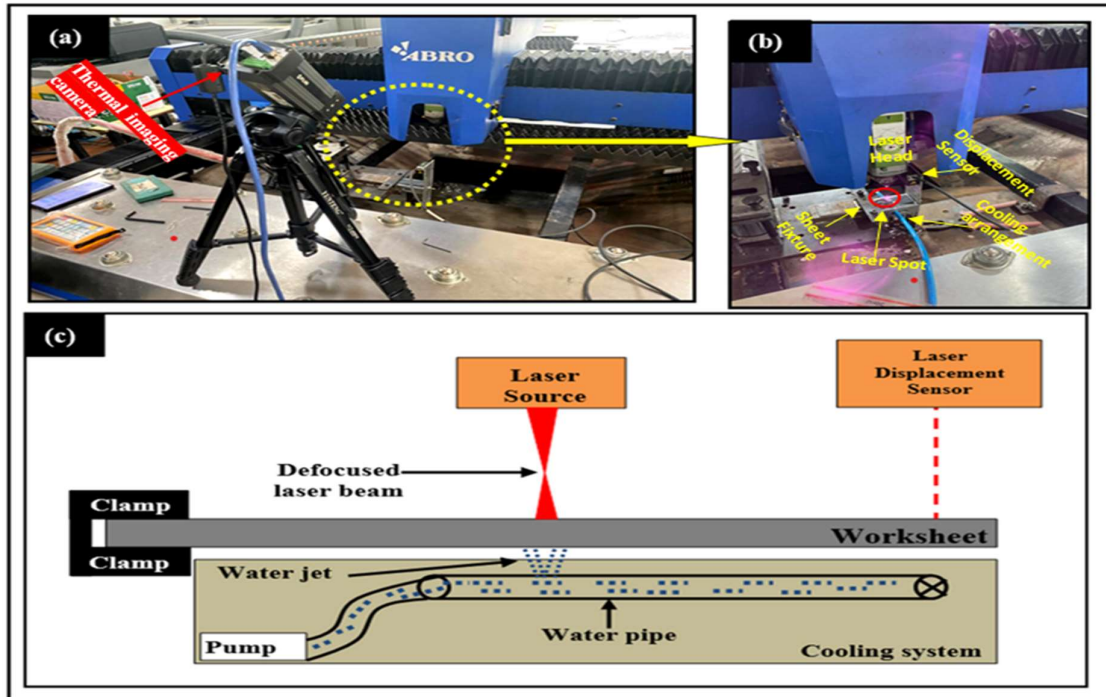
Experimental arrangement (a) schematic of cooling arrangement (b) position of the specimen and thermal imaging camera (c) forced cooling arrangement and position of laser displacement sensor.
